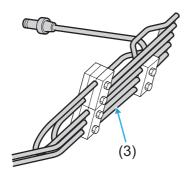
High Pressure Fuel Injection Pipe - Check
